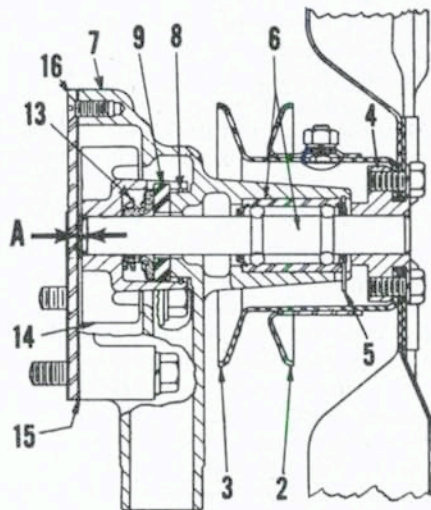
Cut-away drawing of water pump showing 1/32-inch clearance (A) between impeller and pump body. See Fig. 86 for legend.
